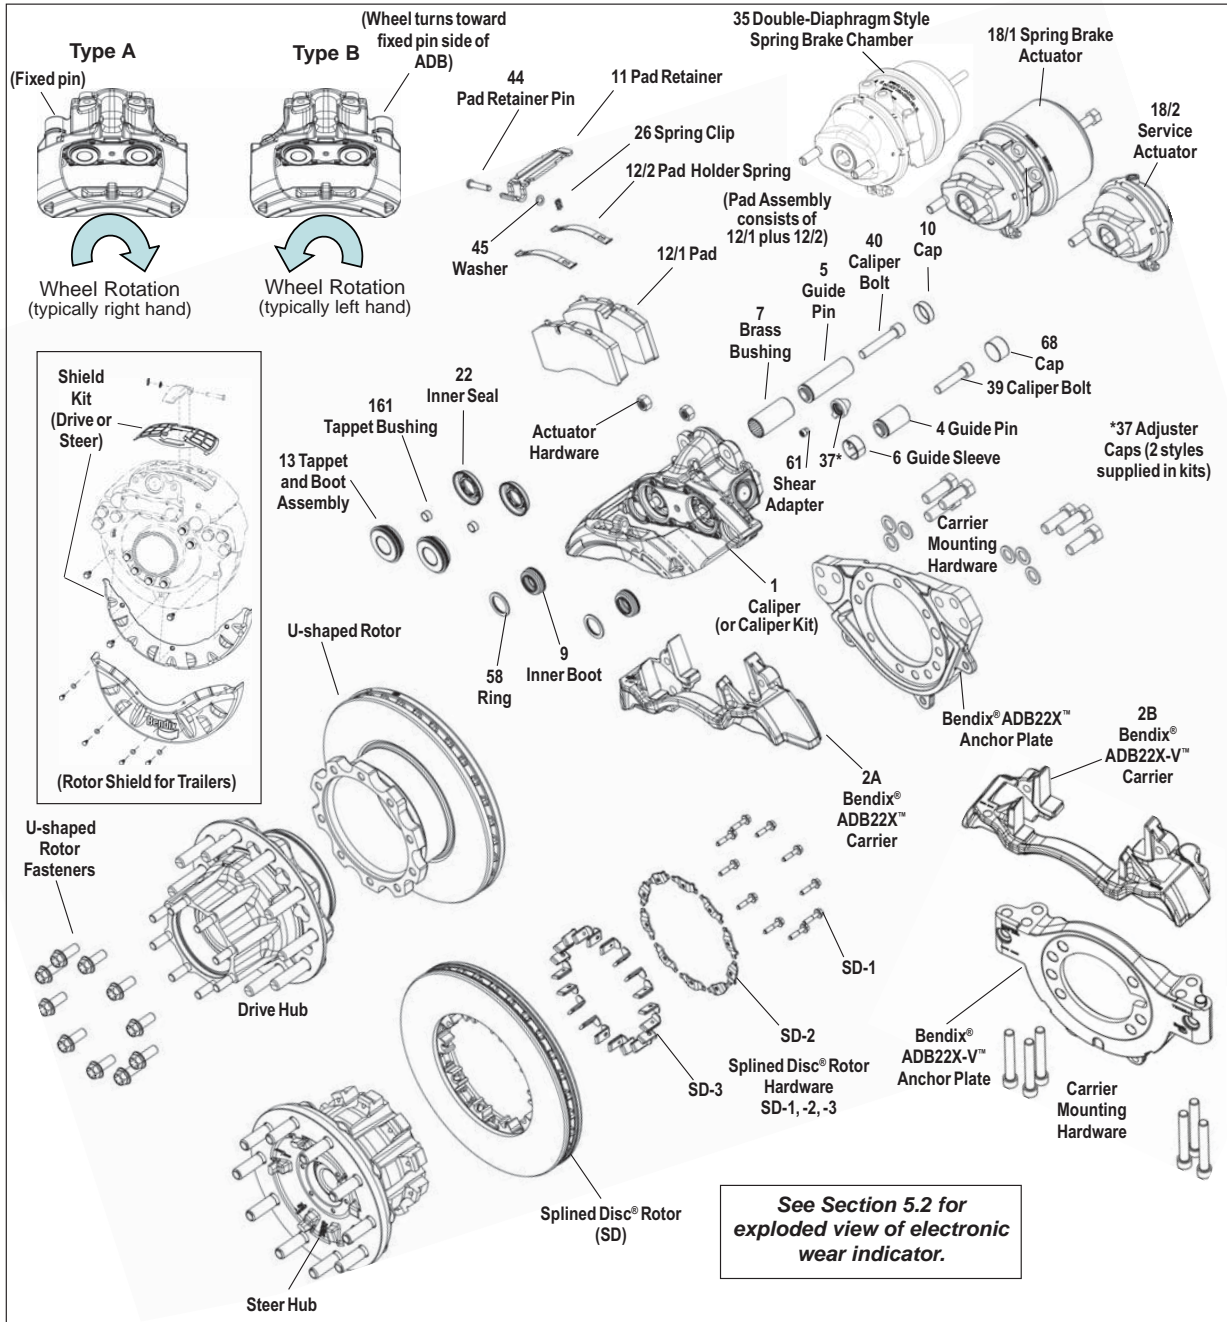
EXPLODED VIEW - BENDIX® ADB22X™ AND ADB22X-V™ AIR DISC BRAKES
